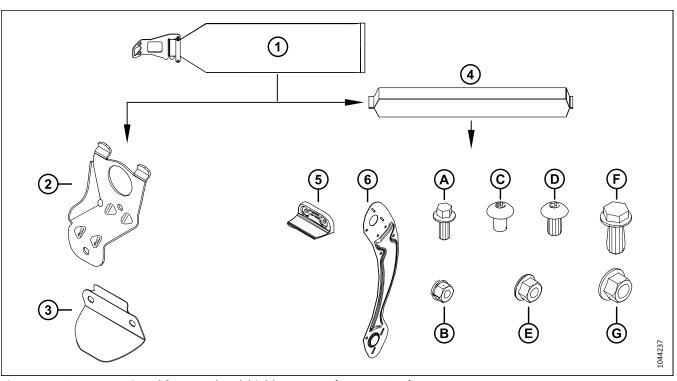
Parts Retrieved from Reel Endshield Parts Bag (MD #368325)
